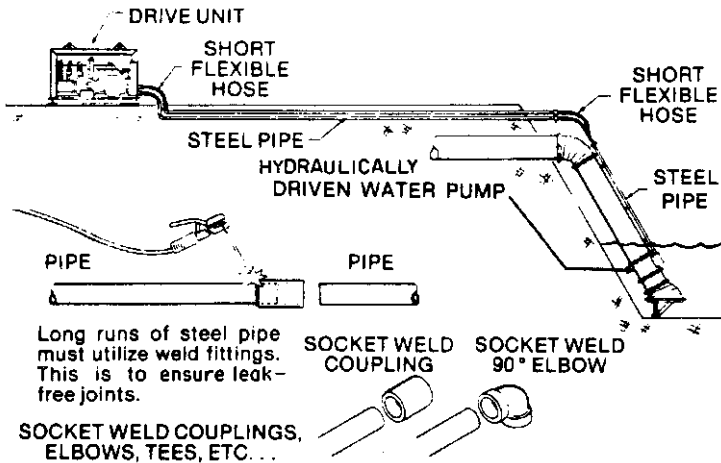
For permanent installation, steel pipes with welded joints are generally used for the hydraulic oil conduits instead of hoses.
